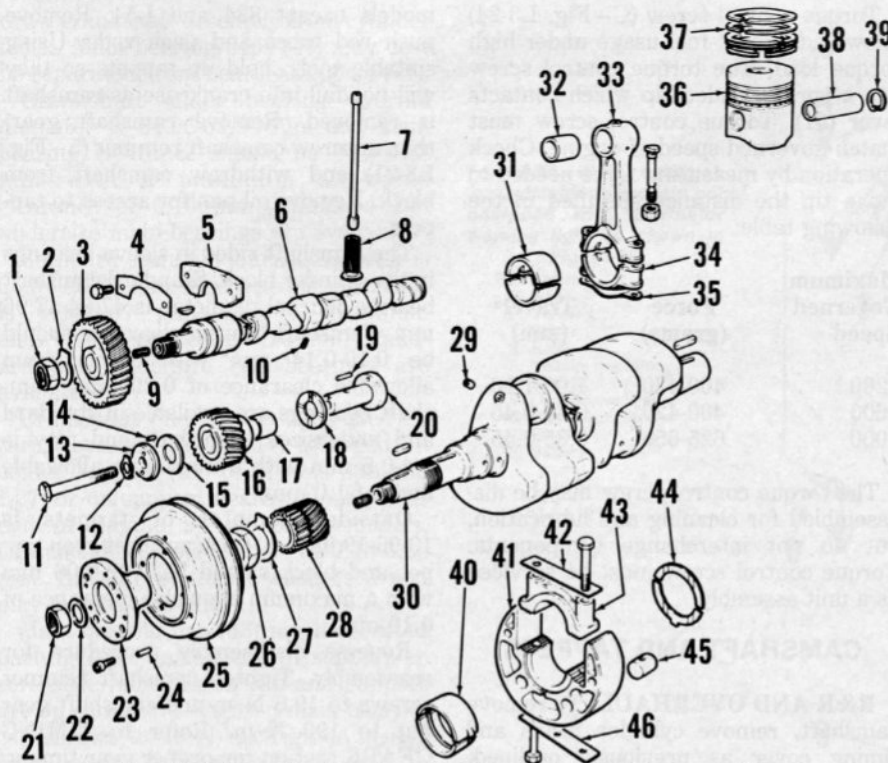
Exploded view of crankshaft, camshaft and idler assemblies.
